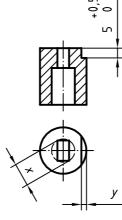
Type AR — Headless matrix with rectangular cutting shape
